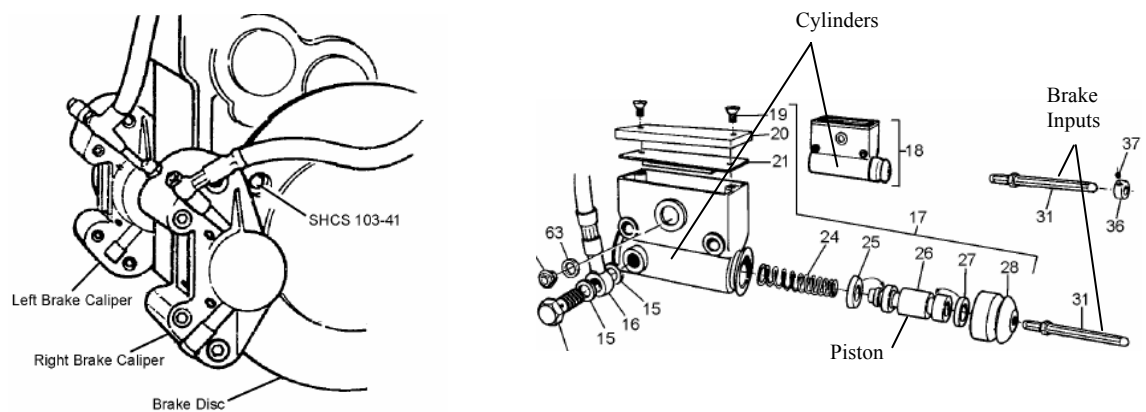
Hydraulic brake systems (Source: (Ontario Drive & Gear, 2007))
